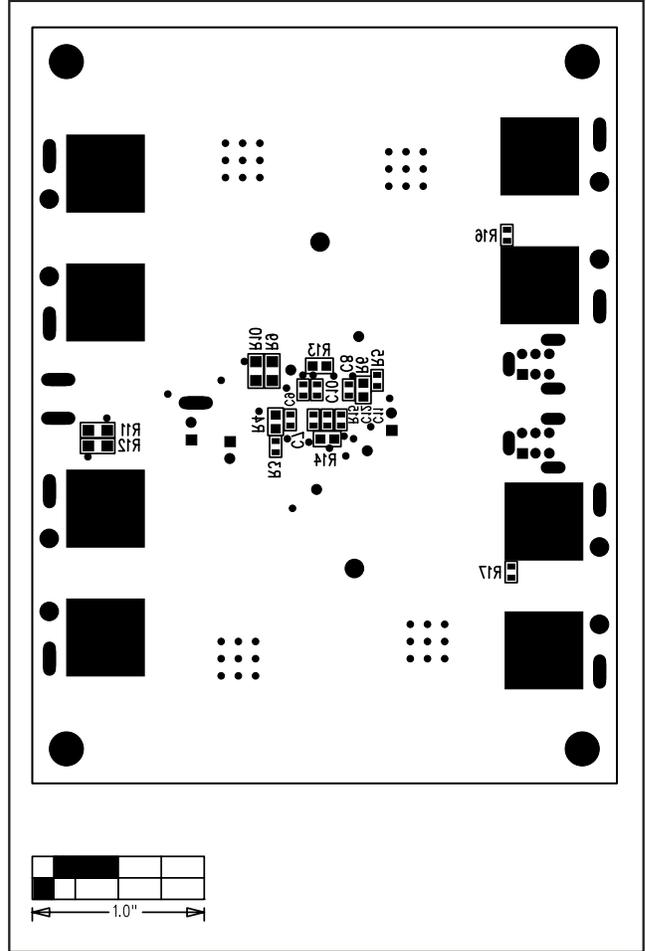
MAX5944 EV Kit Component Placement Guide—Solder Side
